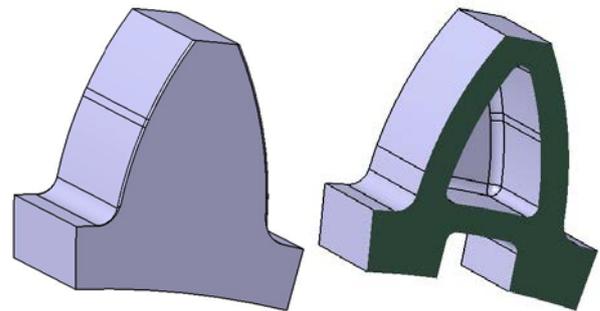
Full body tooth (a), shell body tooth (with a section view) (b).
